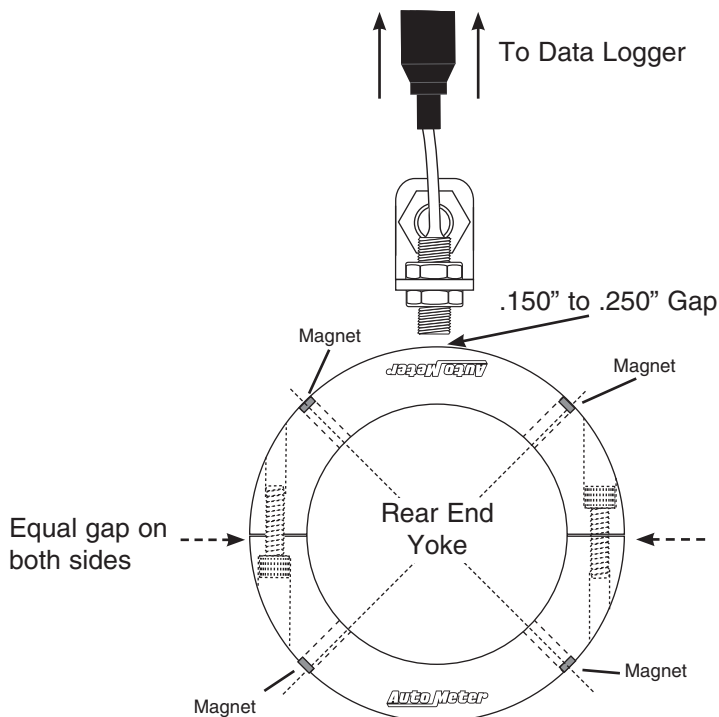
Drive Shaft RPM Sensor and Collar Installation
